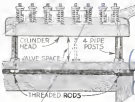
This method of supporting and holding the cylinder head is useful in removing carbon and grinding valves.
